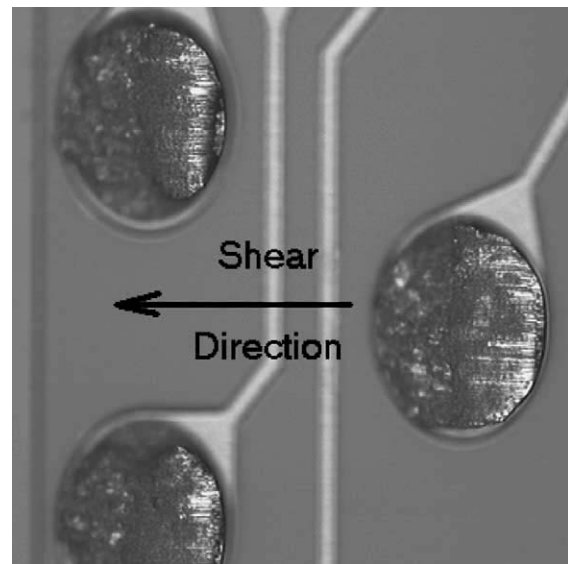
Shear fracture surface as fabricated with the chosen Spheron polymer material. It indicates shear rupture through bulk of solder.
